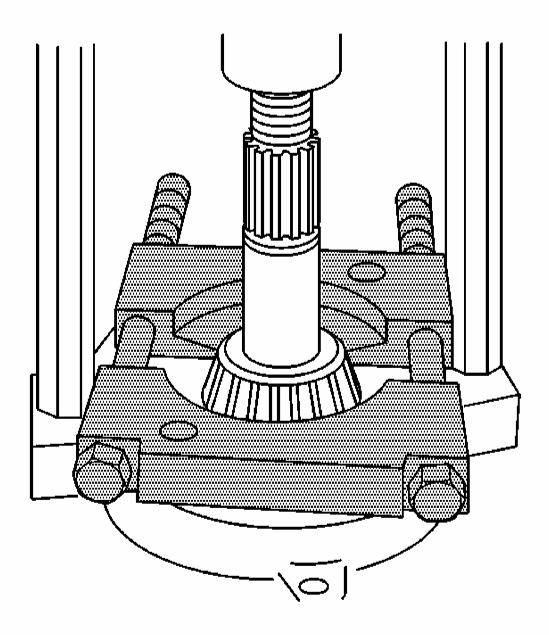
Removing Inner Pinion Bearing Using Hydraulic Press Courtesy of GENERAL MOTORS CORP.
